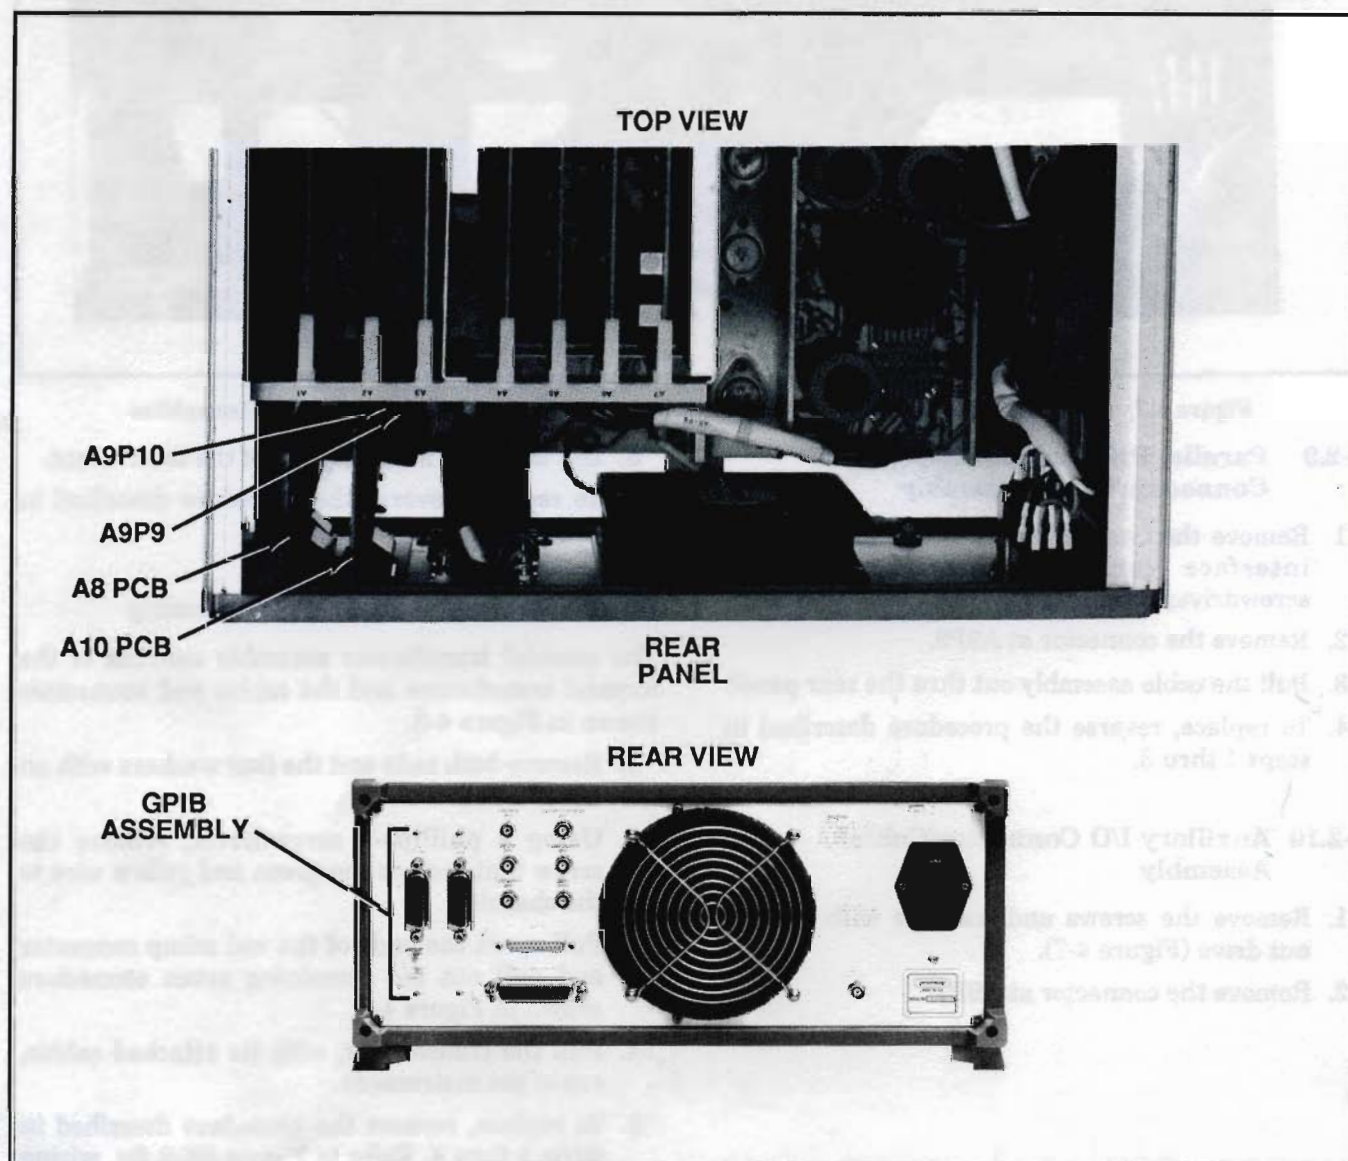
Replacing the GPIB (A8 and A10 PCBs) Assembly
